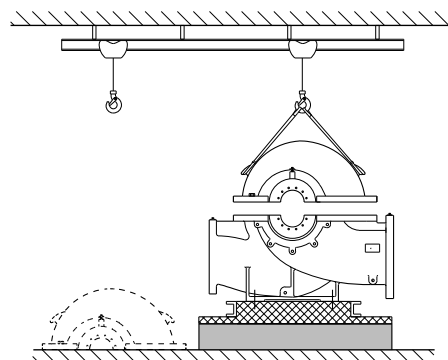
LS pump with accessibility for inspection and headroom for the use of an overhead crane
